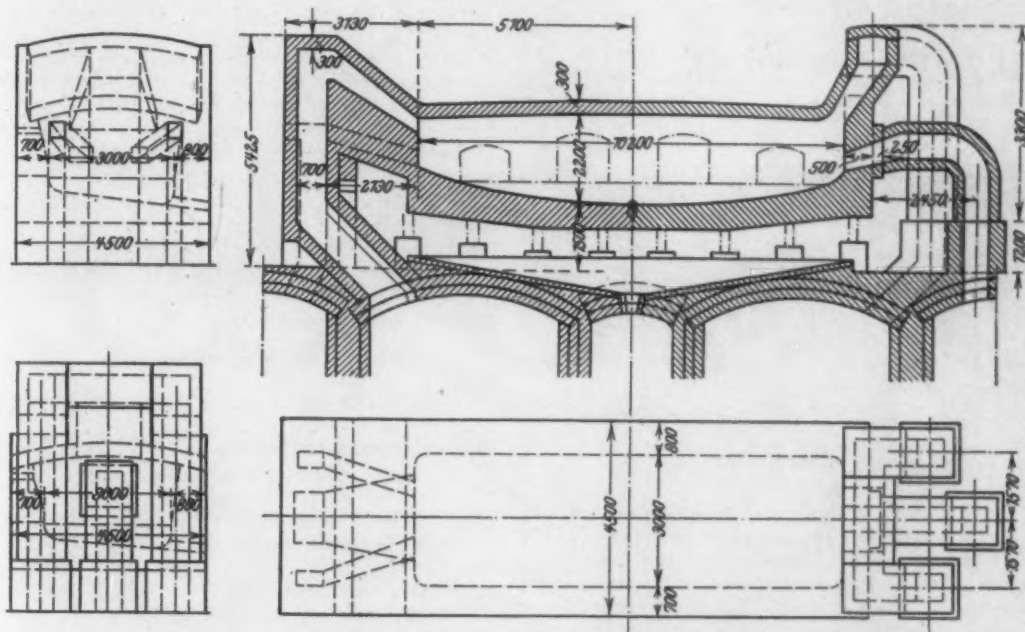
Plan and Section of 40-Ton Open Hearth Furnace. The New Arrangement is Shown on the Right-Hand Side of the Furnace and the Old Arrangement on the Left. Dimensions in Millimeters.
